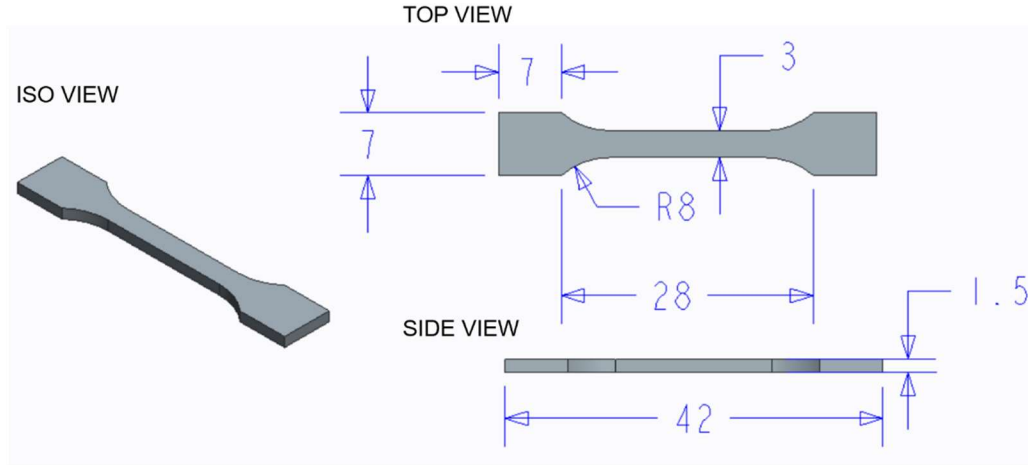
Flat plate-type tension specimen dimensions. All dimensions shown are in mm.
